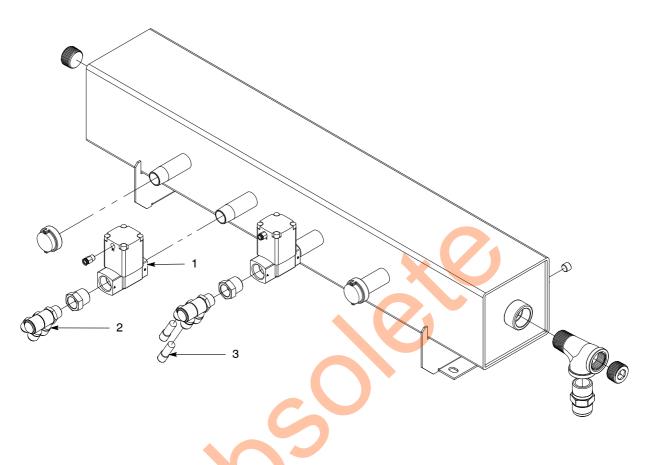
Accumulator Tank Assembly. View Depicts Six-Pump Configuration, Hinge-Side Installation, Without Feed Center.
